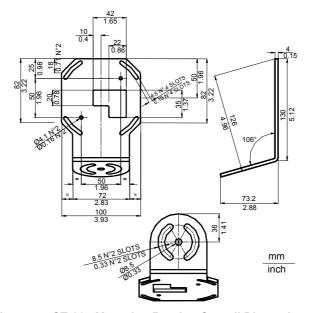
ST-237 Mounting Bracket Overall Dimensions
